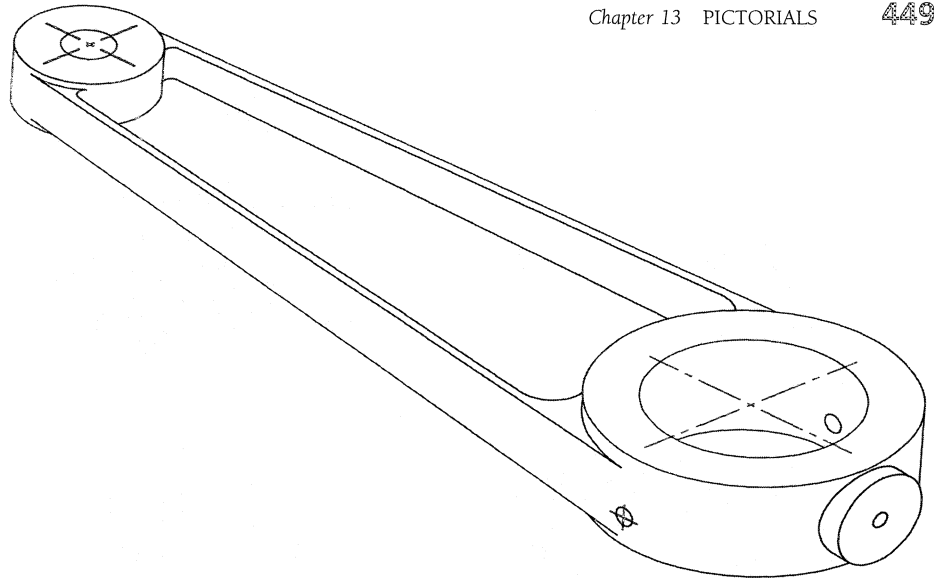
Isometric Drawing Created on AutoCAD
